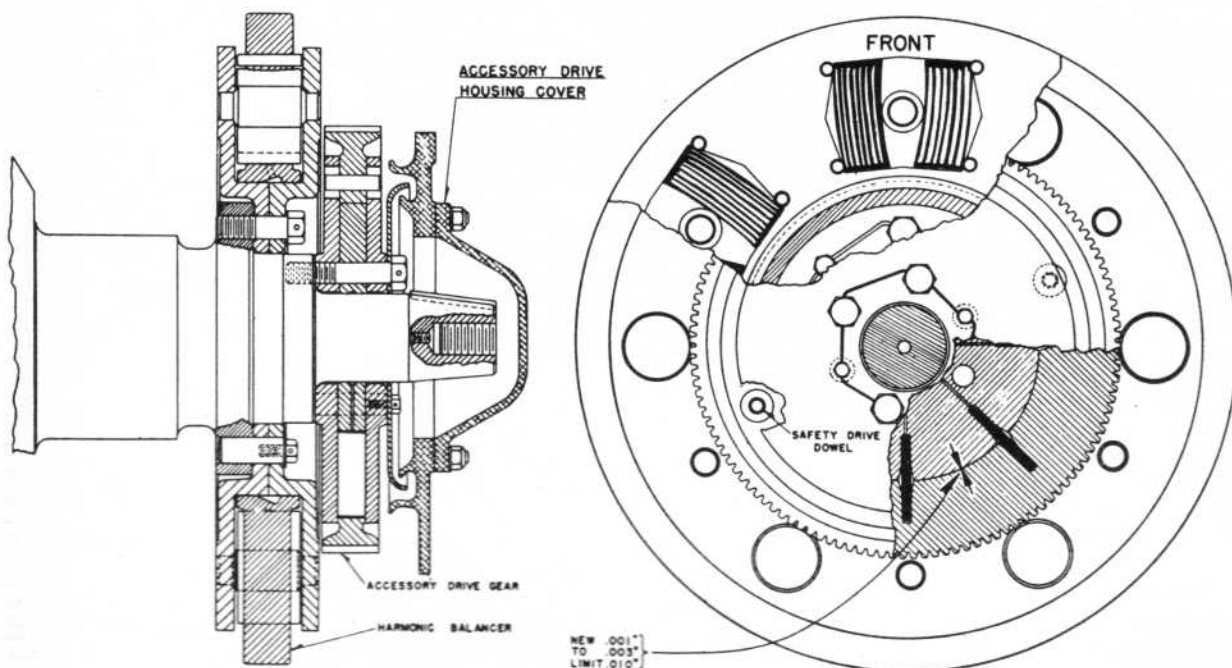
General arrangement of harmonic balancer and the flexible gear drive to accessories
